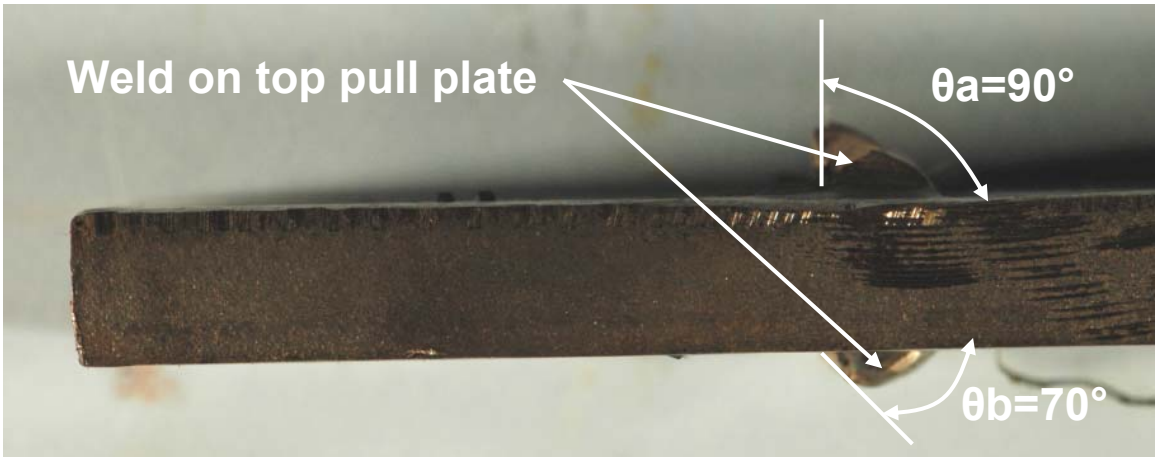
Photograph of a side view Specimen 2, where the profile of the fractured weld on the top pull plate is visible
